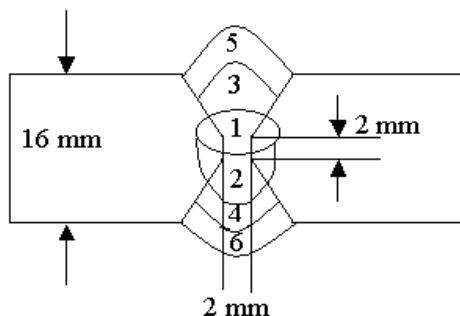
Welding passes of NIOMOL 490K steel
